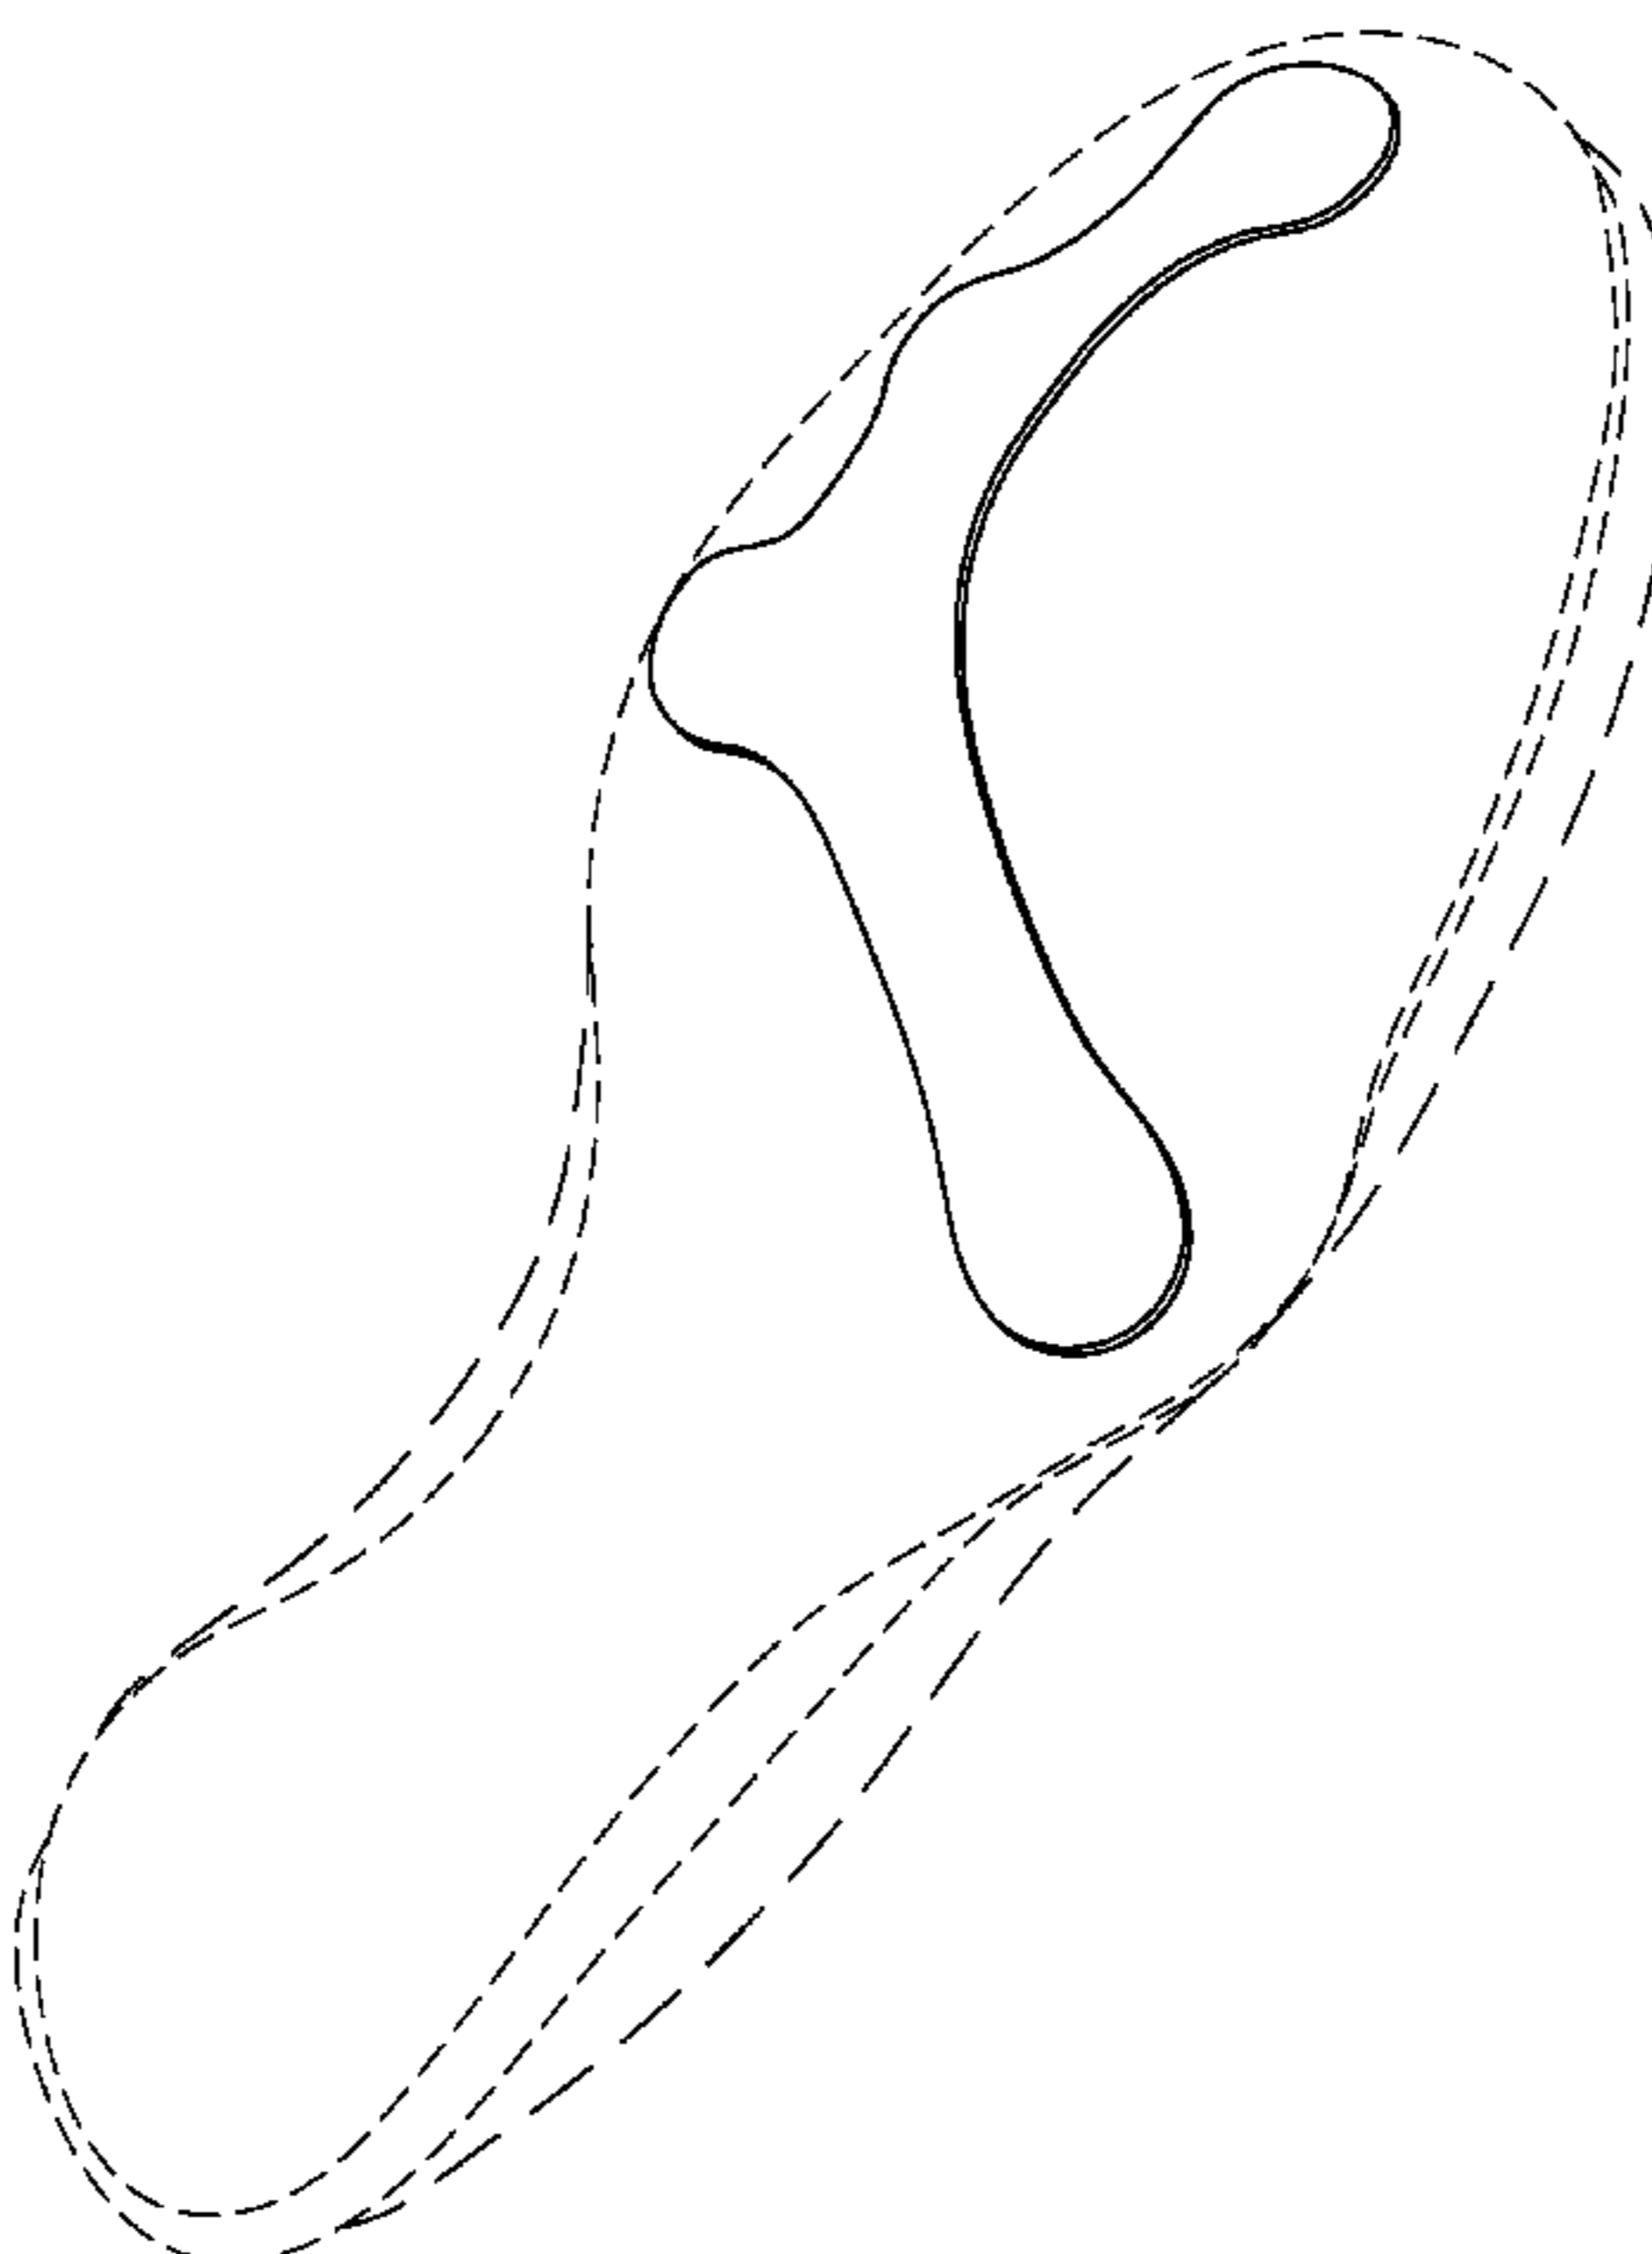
is a bottom view of the forefoot plate for a shoe sole;
